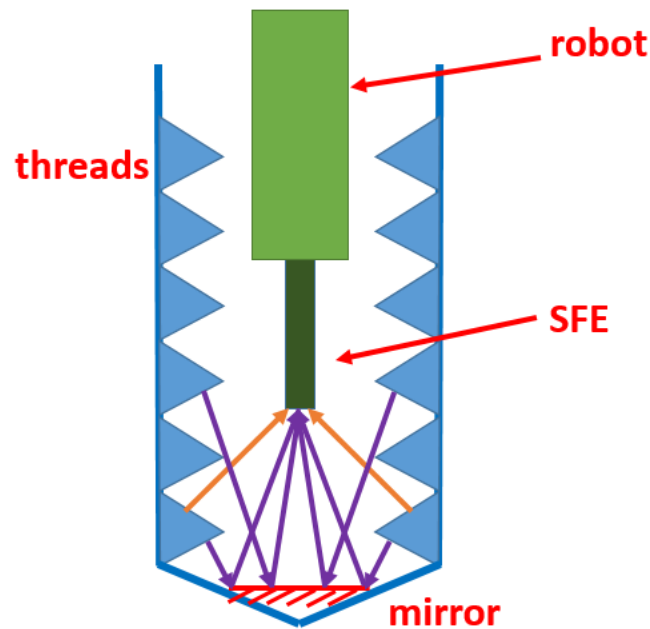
The scheme of SFE imaging of front and back flank by placing a mirror at the bottom of the threaded hole. The SFE is moved along the axis of threads hole by robot to image front and back flanks evenly. The orange represent the reflectance of front flank, as well as the purple stands for the back flank reflectance. The change of the SFE location causes the amount change of front and back flanks captured. As SFE move downwards, more back flank is captured.
